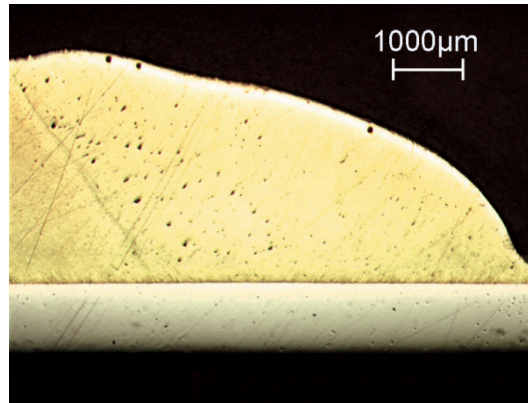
Micrograph of a CMT produced welding seam of Aluminum to a steel sheet
